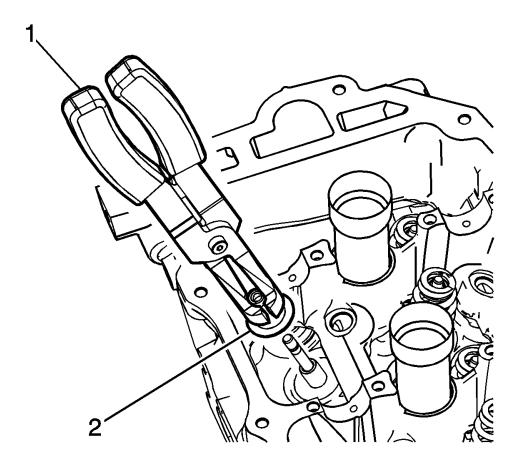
View Of Valve Spring Courtesy of GENERAL MOTORS COMPANY
